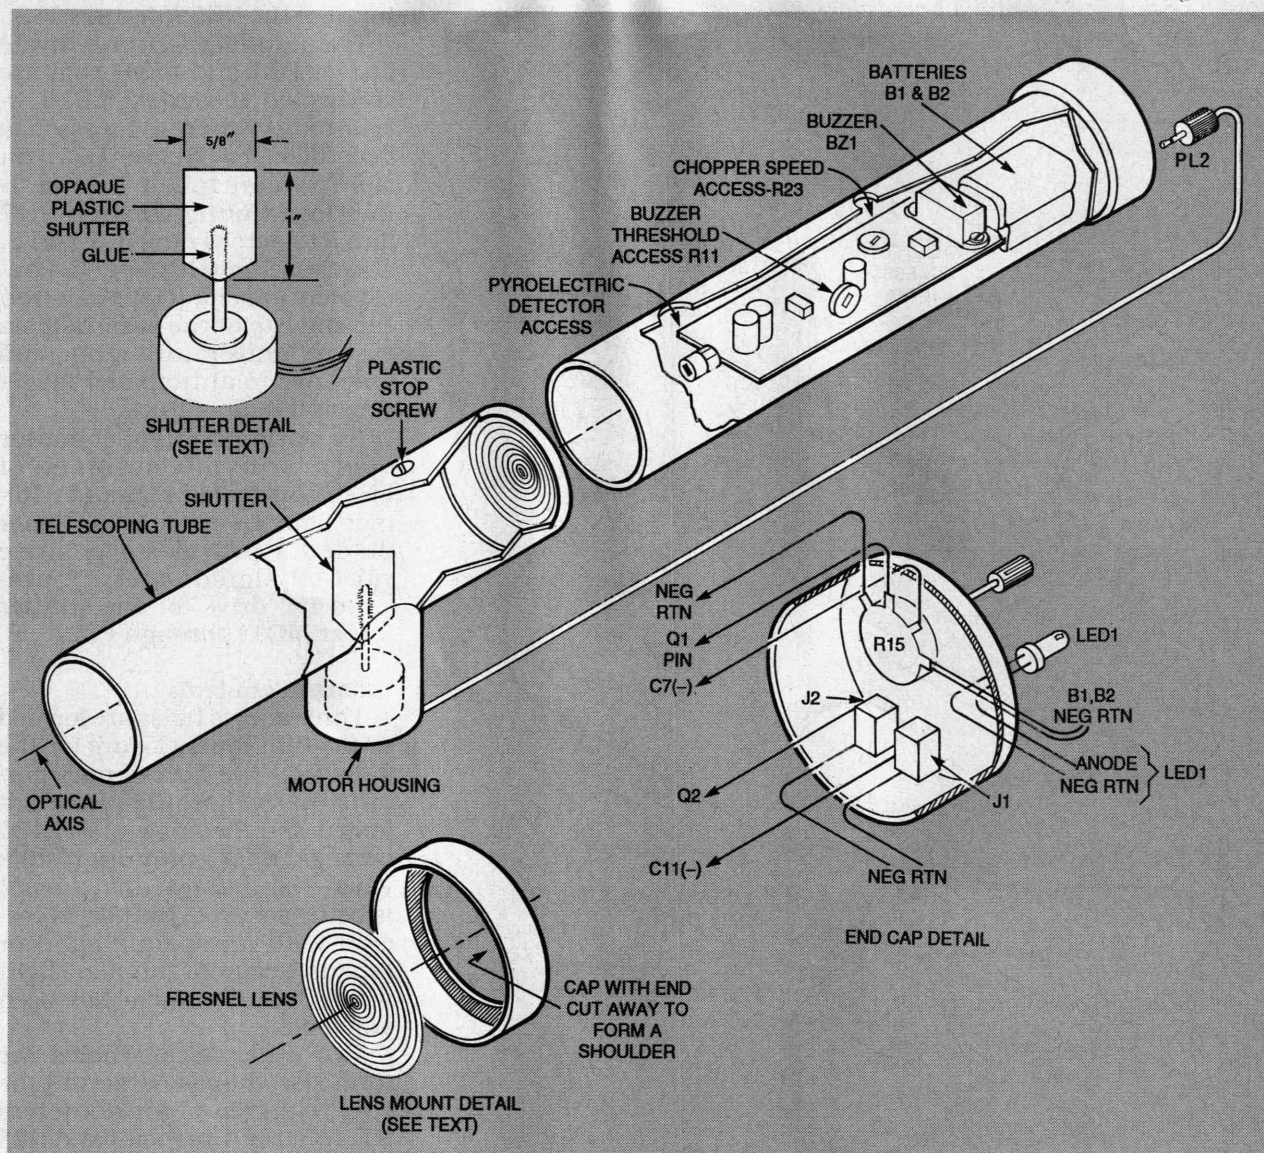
CUTAWAY VIEW OF THE INFRARED BODY HEAT DETECTOR with details for making the shutter, lens mount, and end-cap assemblies.
